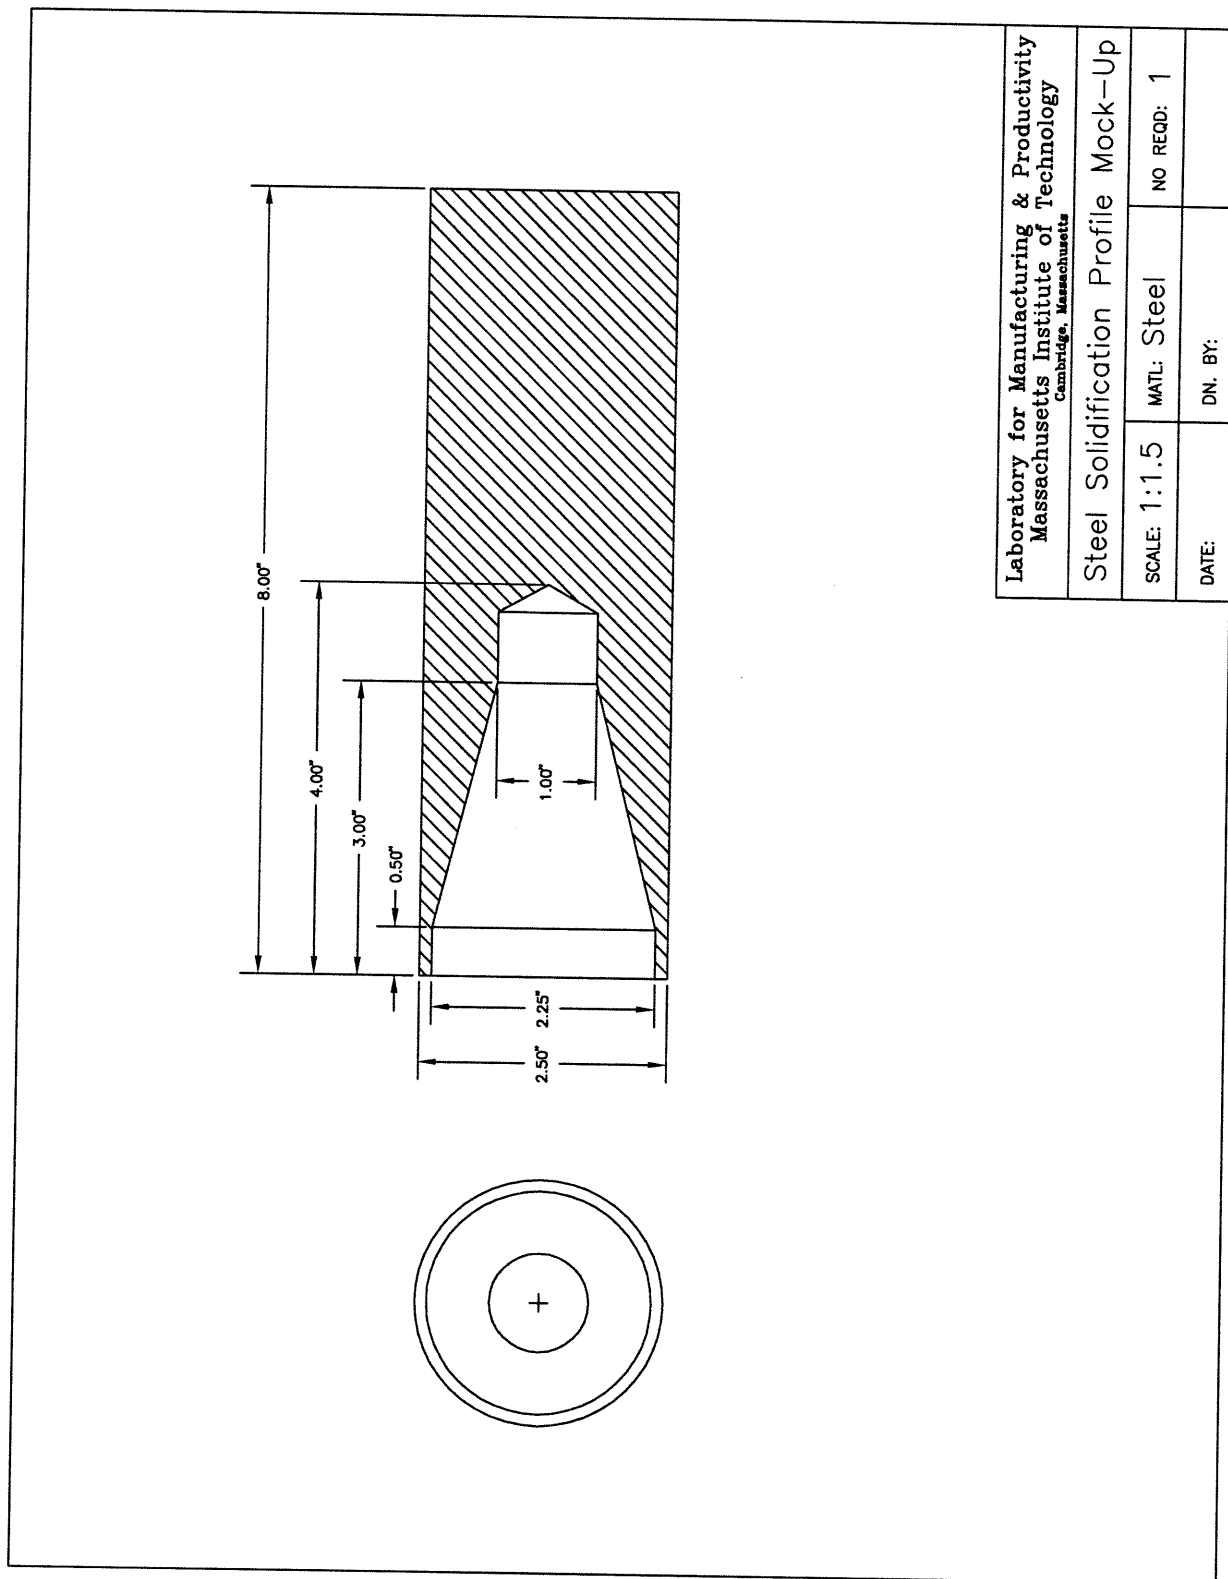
Detail Drawing of Solidification Front Mock-Up
